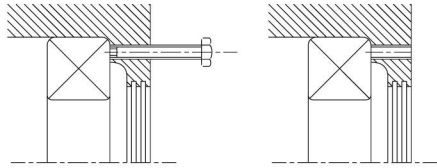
push-out outer ring with crew hole and unthreaded hole
